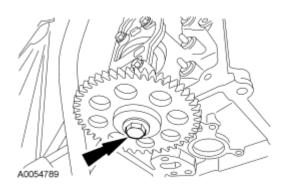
Camshaft Gear Bolt Courtesy of FORD MOTOR CO.
